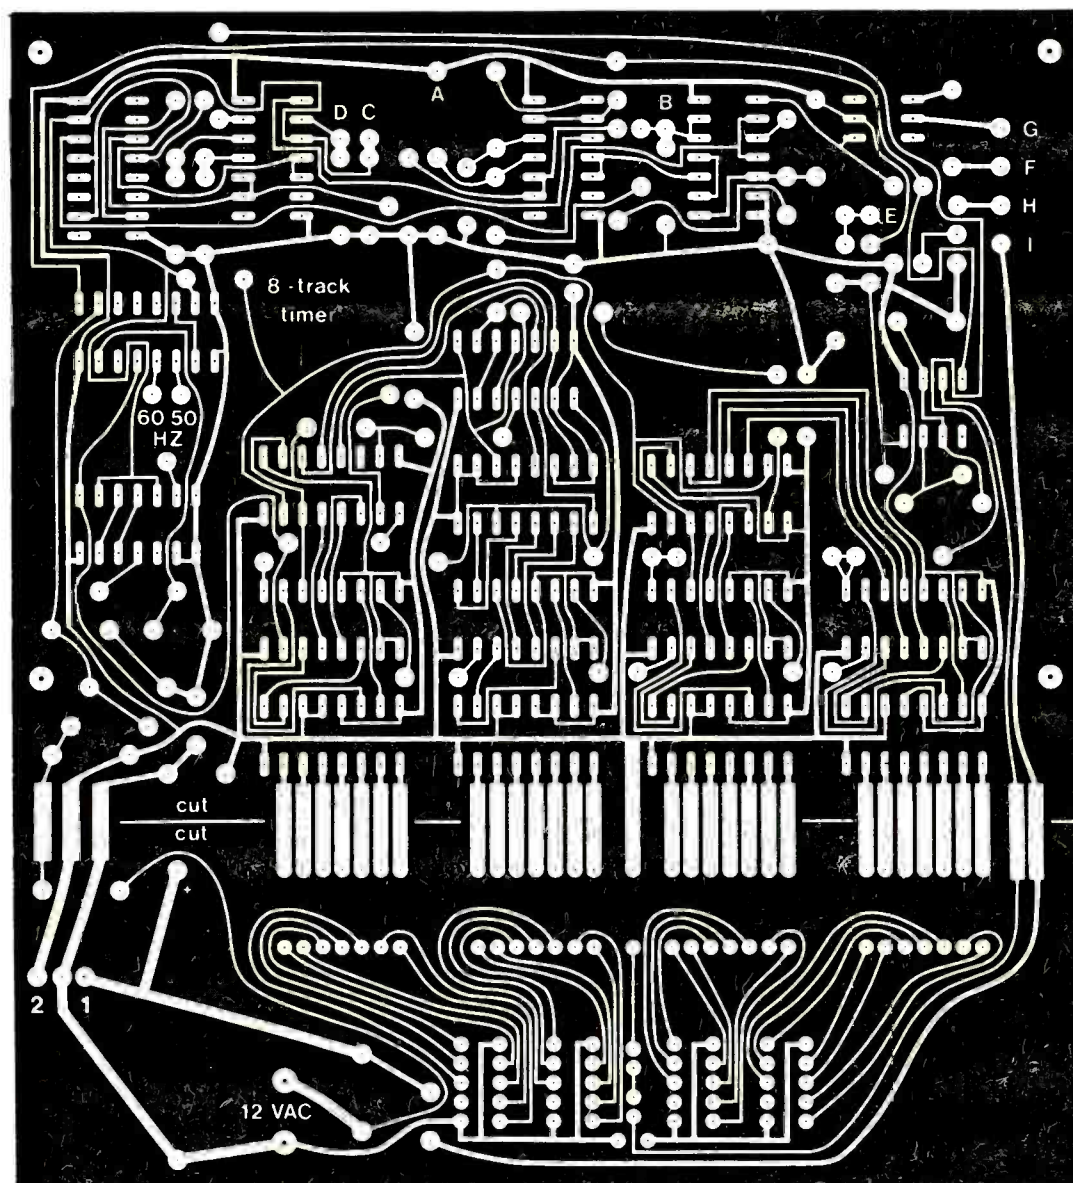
Actual-size foil pattern for the 8TT's single pc board.
